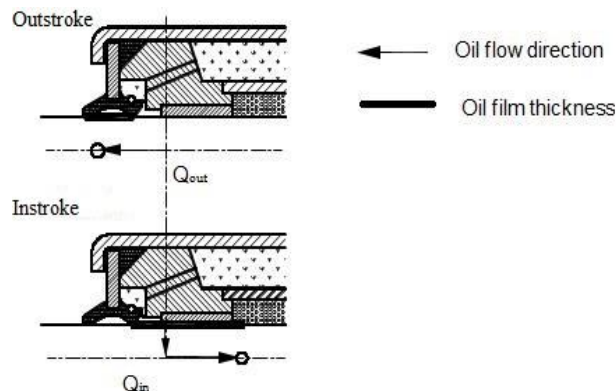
Definition of instroke and outstroke of a reciprocating seal
